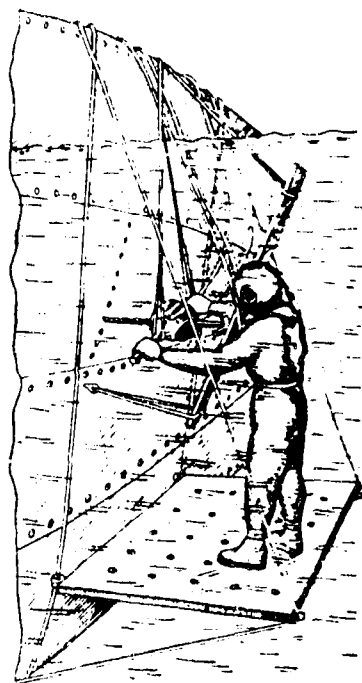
Drilling Holes in a Ship Hull with Pneumatic Drill, Using a Plate Lever Rig.
